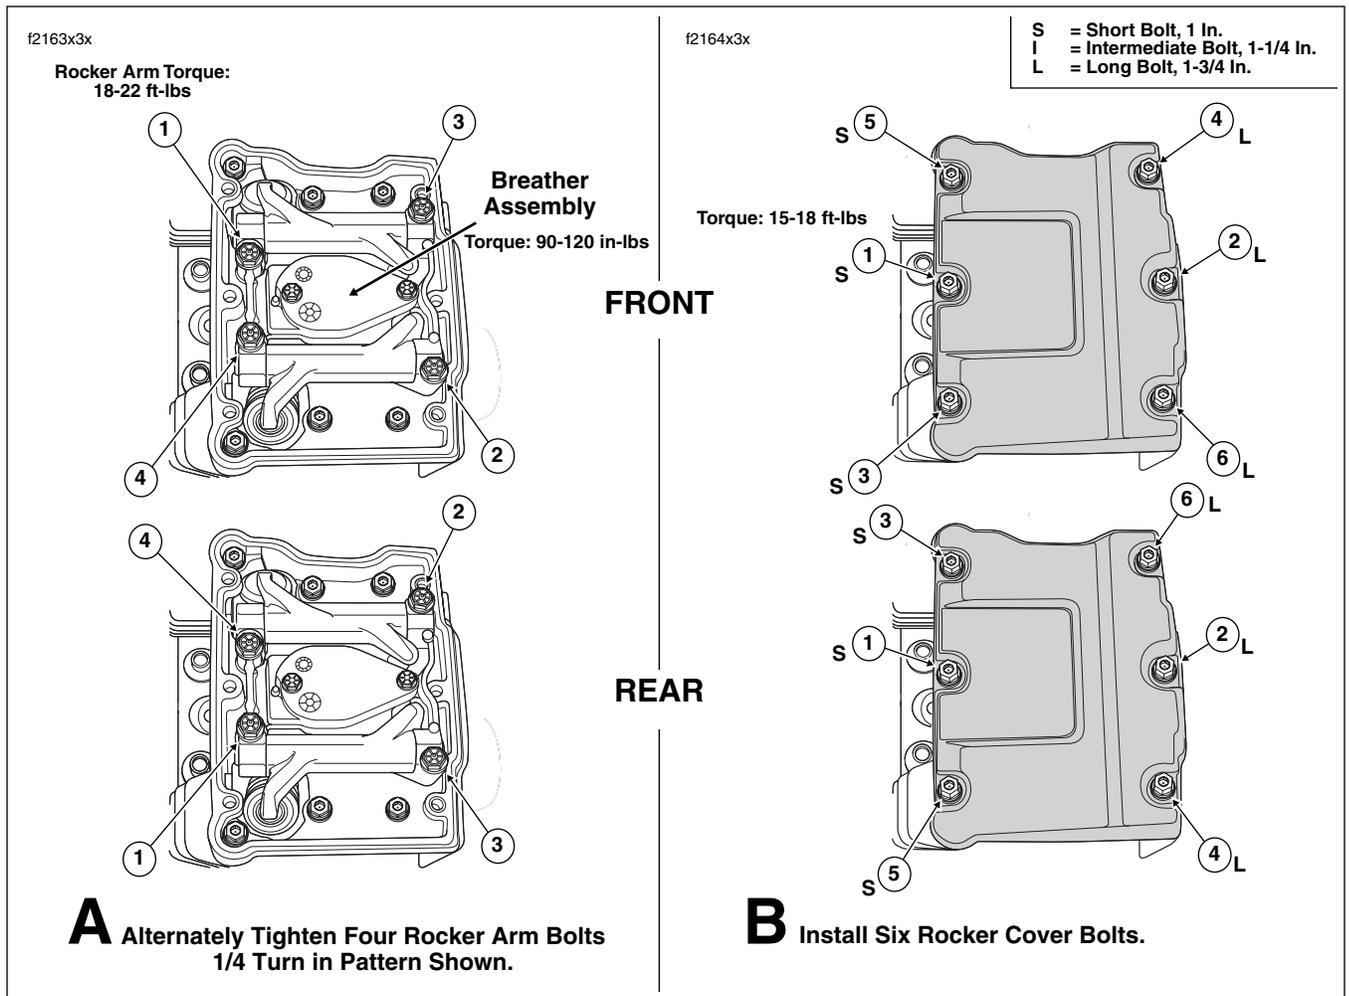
Rocker Arm/Rocker Cover Torque Sequence and Bolt Size
